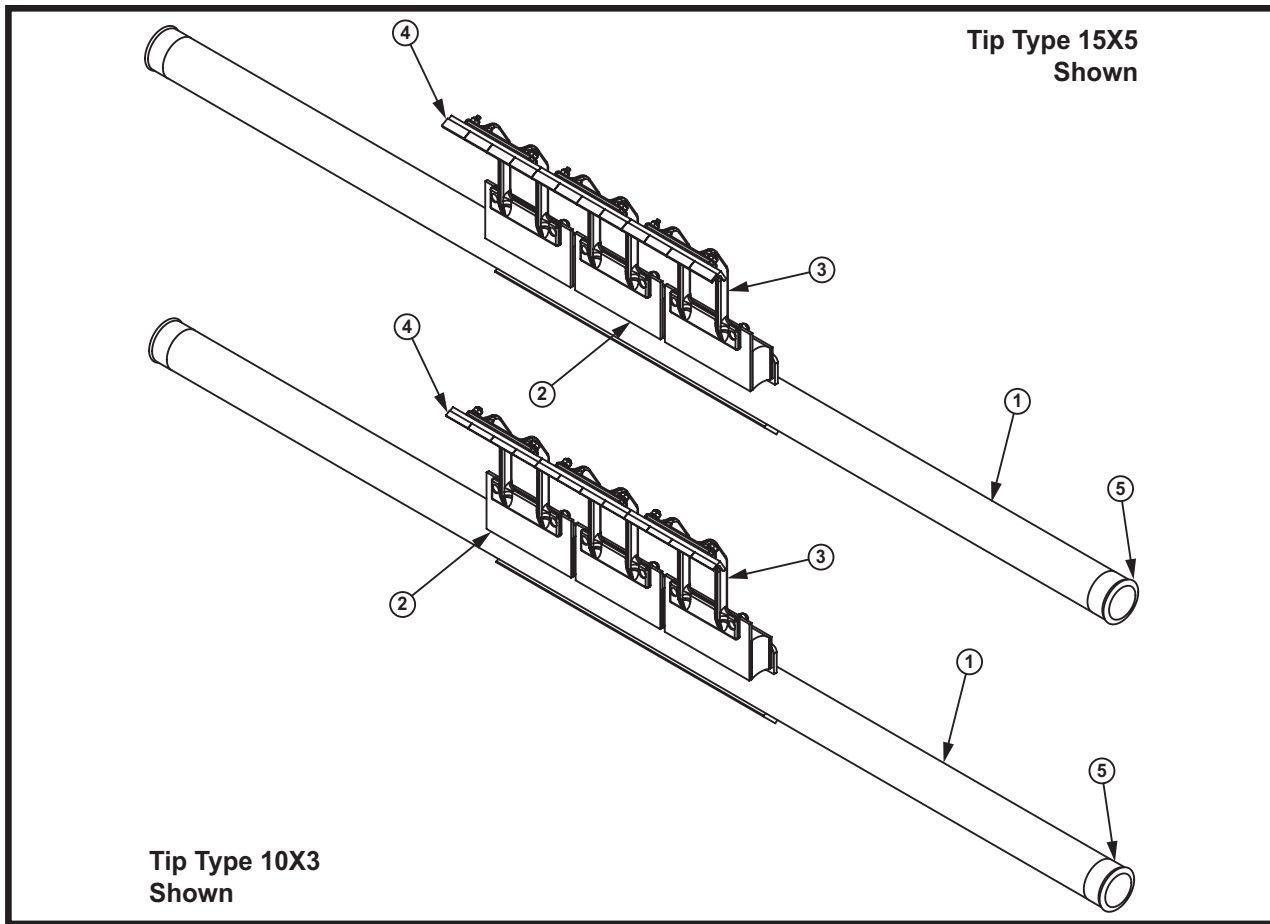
Martin® H1 Primary Belt Cleaner HD, P/N C1HXXSXXXXXXXX
